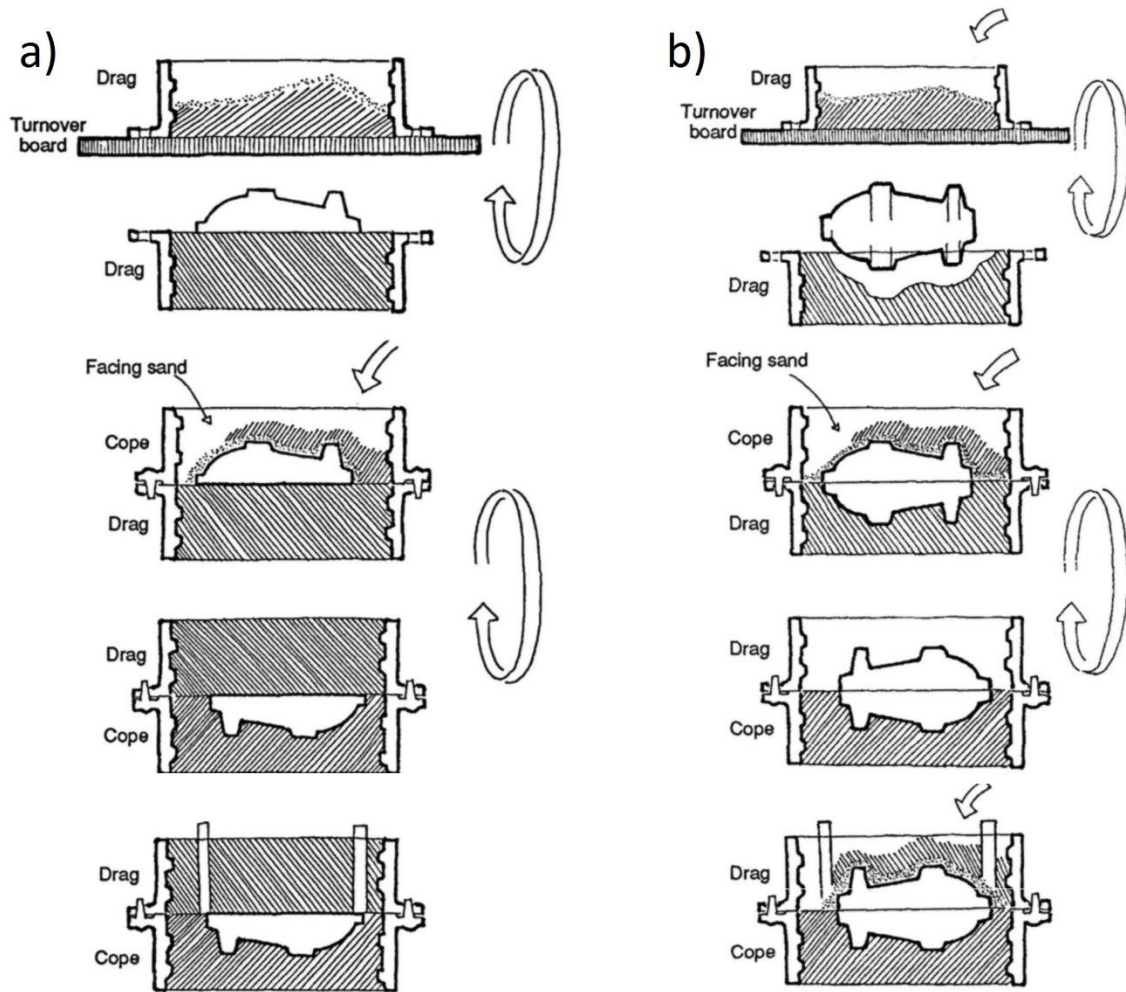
Two-box moulding technique (Hurst, 1996): a) flat-back moulding, b) odd-side moulding
